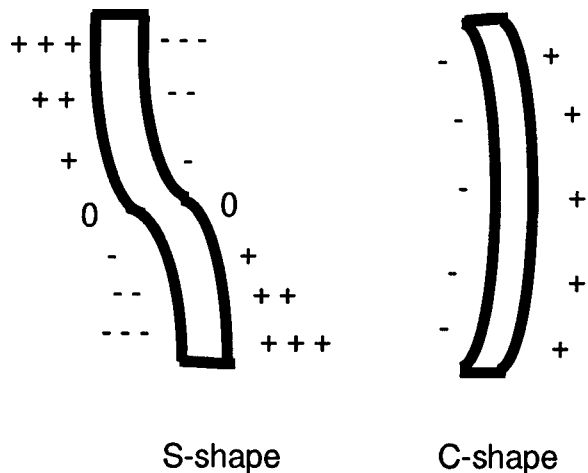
S-Shape and C-Shape Bending of Tensile Specimen
